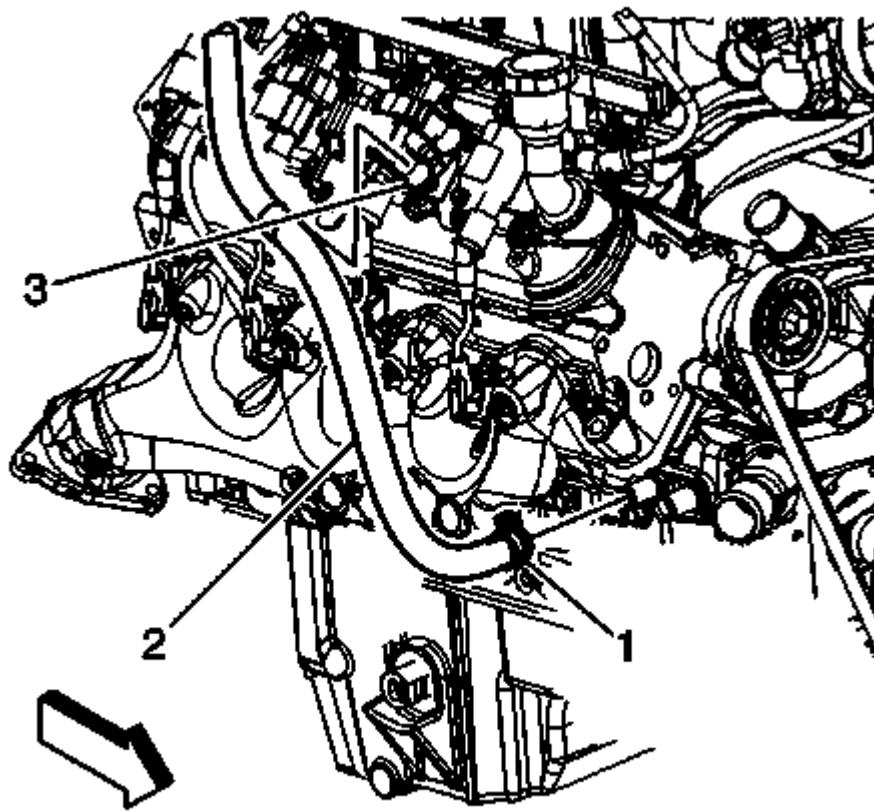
Heater Inlet Hose And Heater Hose Bracket
